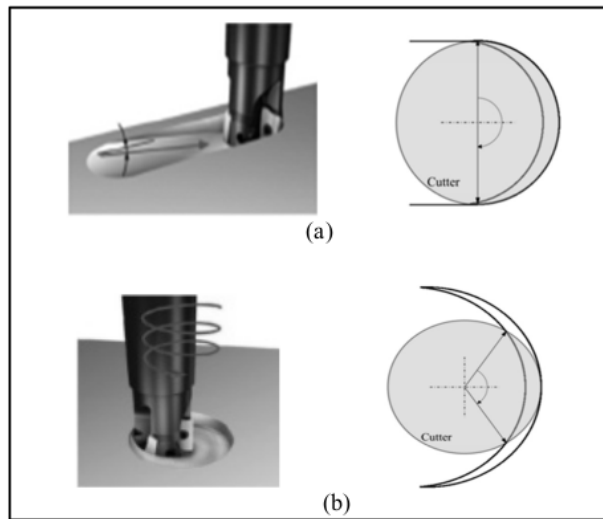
Immersion angle of two tool entry strategies [6] (a) angular ramping and (b) angular ramping
